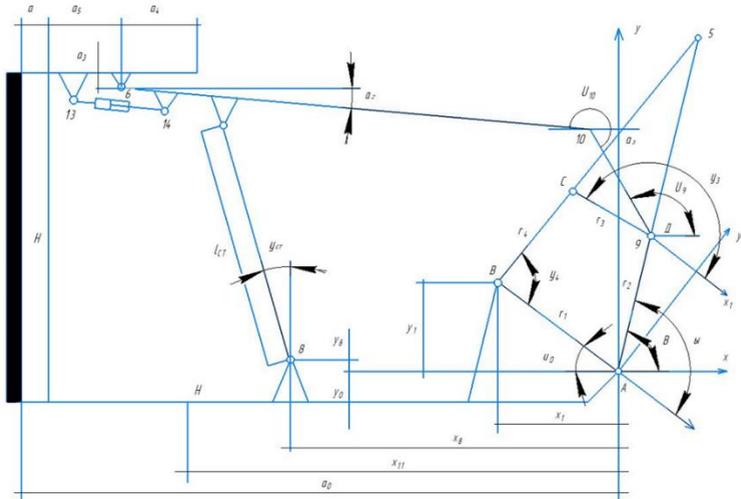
Design diagram of the loading of the support section of the protective-supporting type 2OKP70K
